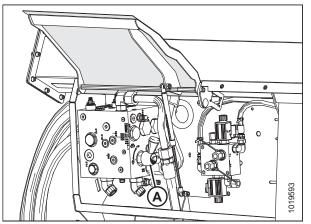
Flow Control Valve (Parts Removed for Clarity)
